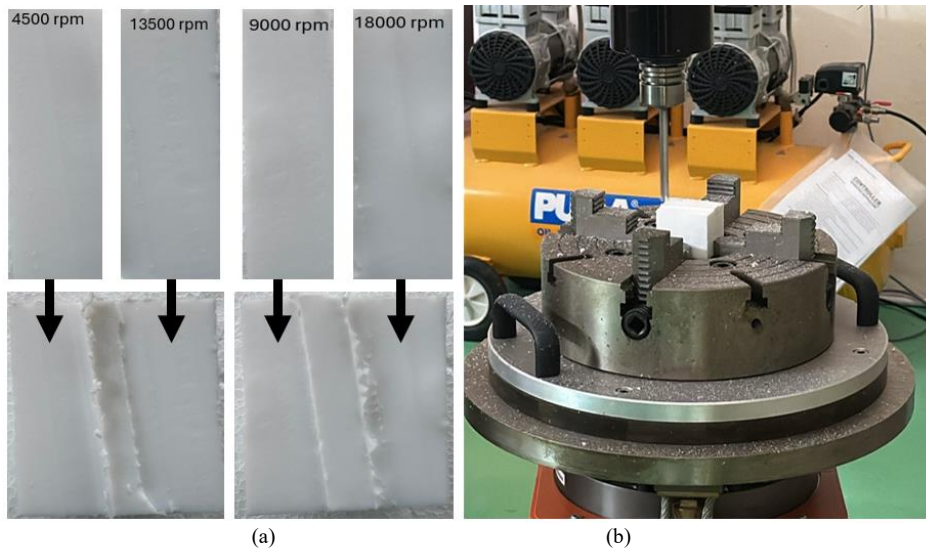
(a) PTFE after machining in different spindle speeds; (b) PTFE during machining
